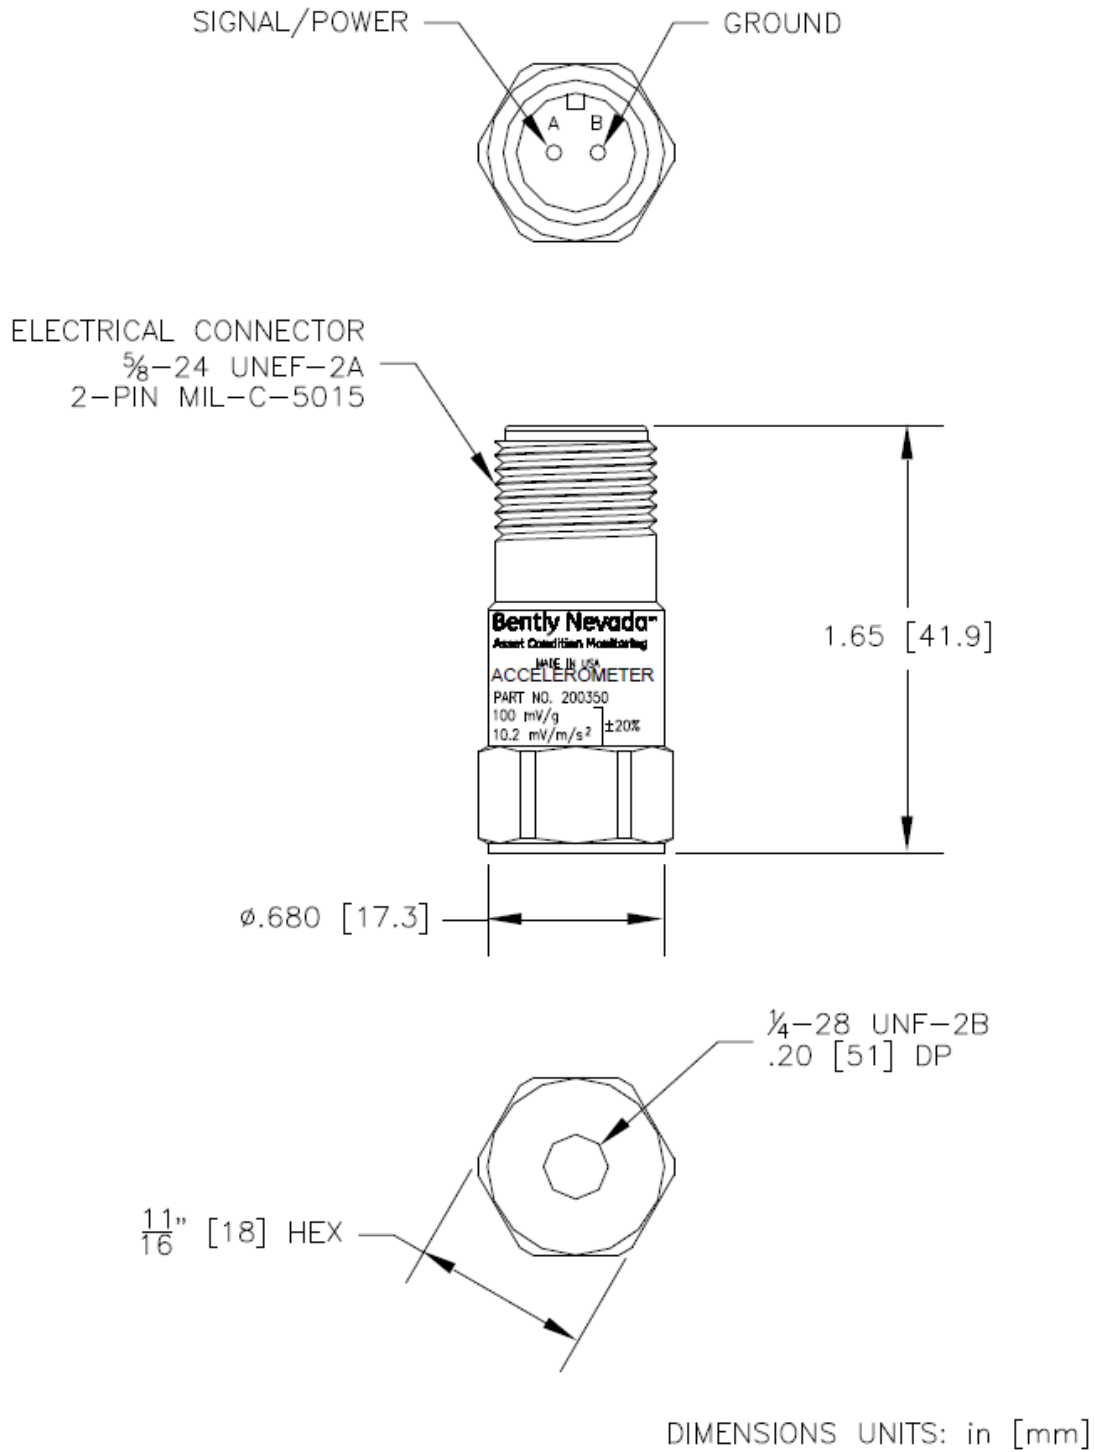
1: 200350 Accelerometer Dimensional Drawing
